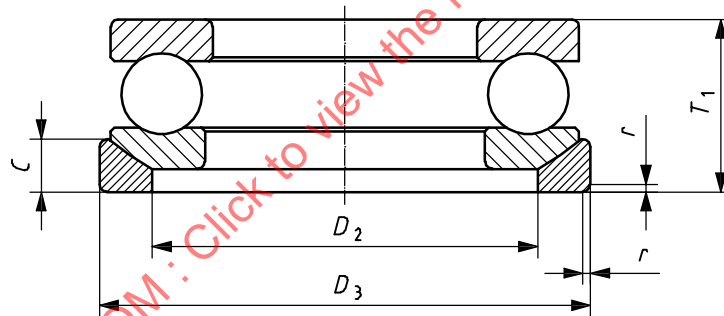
Single-direction aligning thrust ball bearing with aligning seat washer
